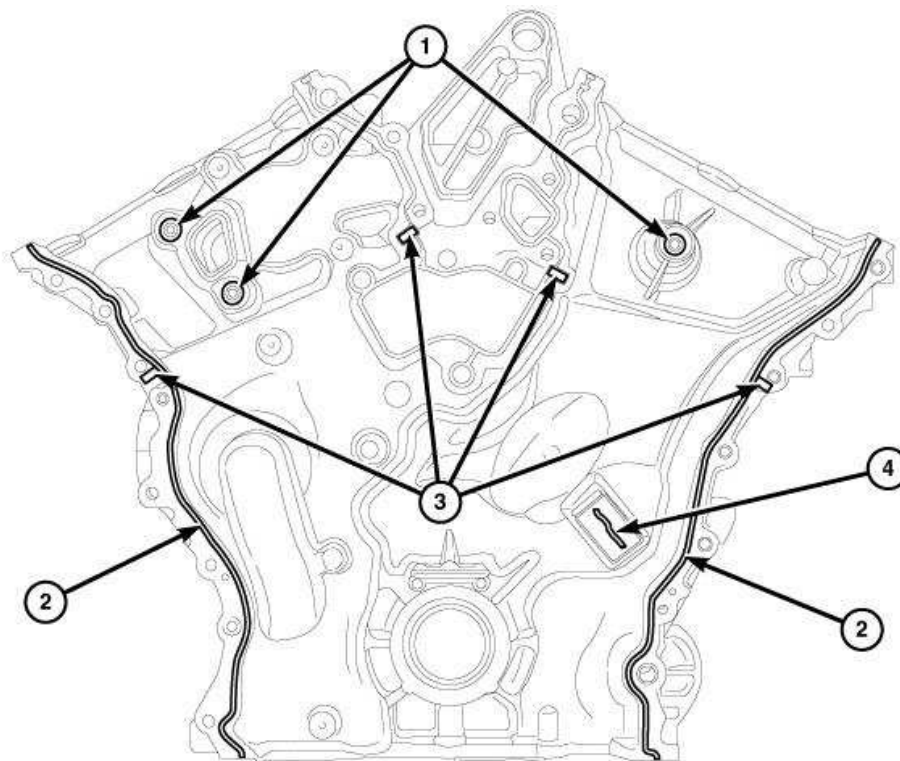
Sealant At Cylinder Head Bosses, Right & Left Flanges, Cylinder Head-To-Engine Block T-Joints & Cover To Right Cam Chain Tensioner Gap
